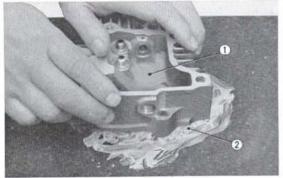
① Cylinder head ② Red lead or bluing
